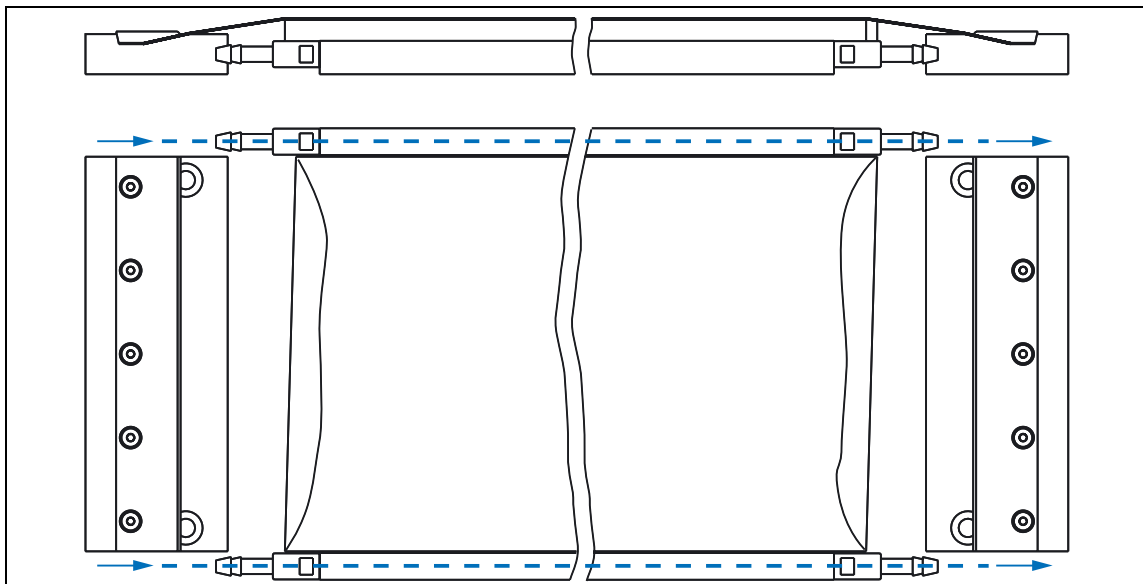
Secondary section cooling consisting of cooling sections with hose connector nipple and cover end pieces on both sides for all 1FN3050...1FN3450 motor models (side and top view)
